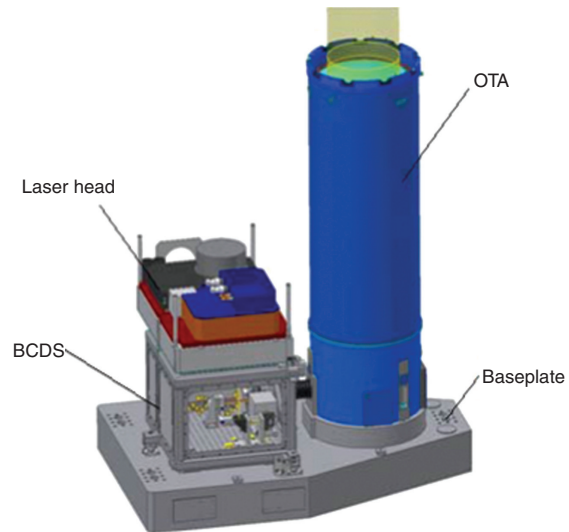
LGS unit assembled on the support baseplate. The laser head is mounted on top of the BCDS, which is bolted on the steel baseplate next to the OTA.
